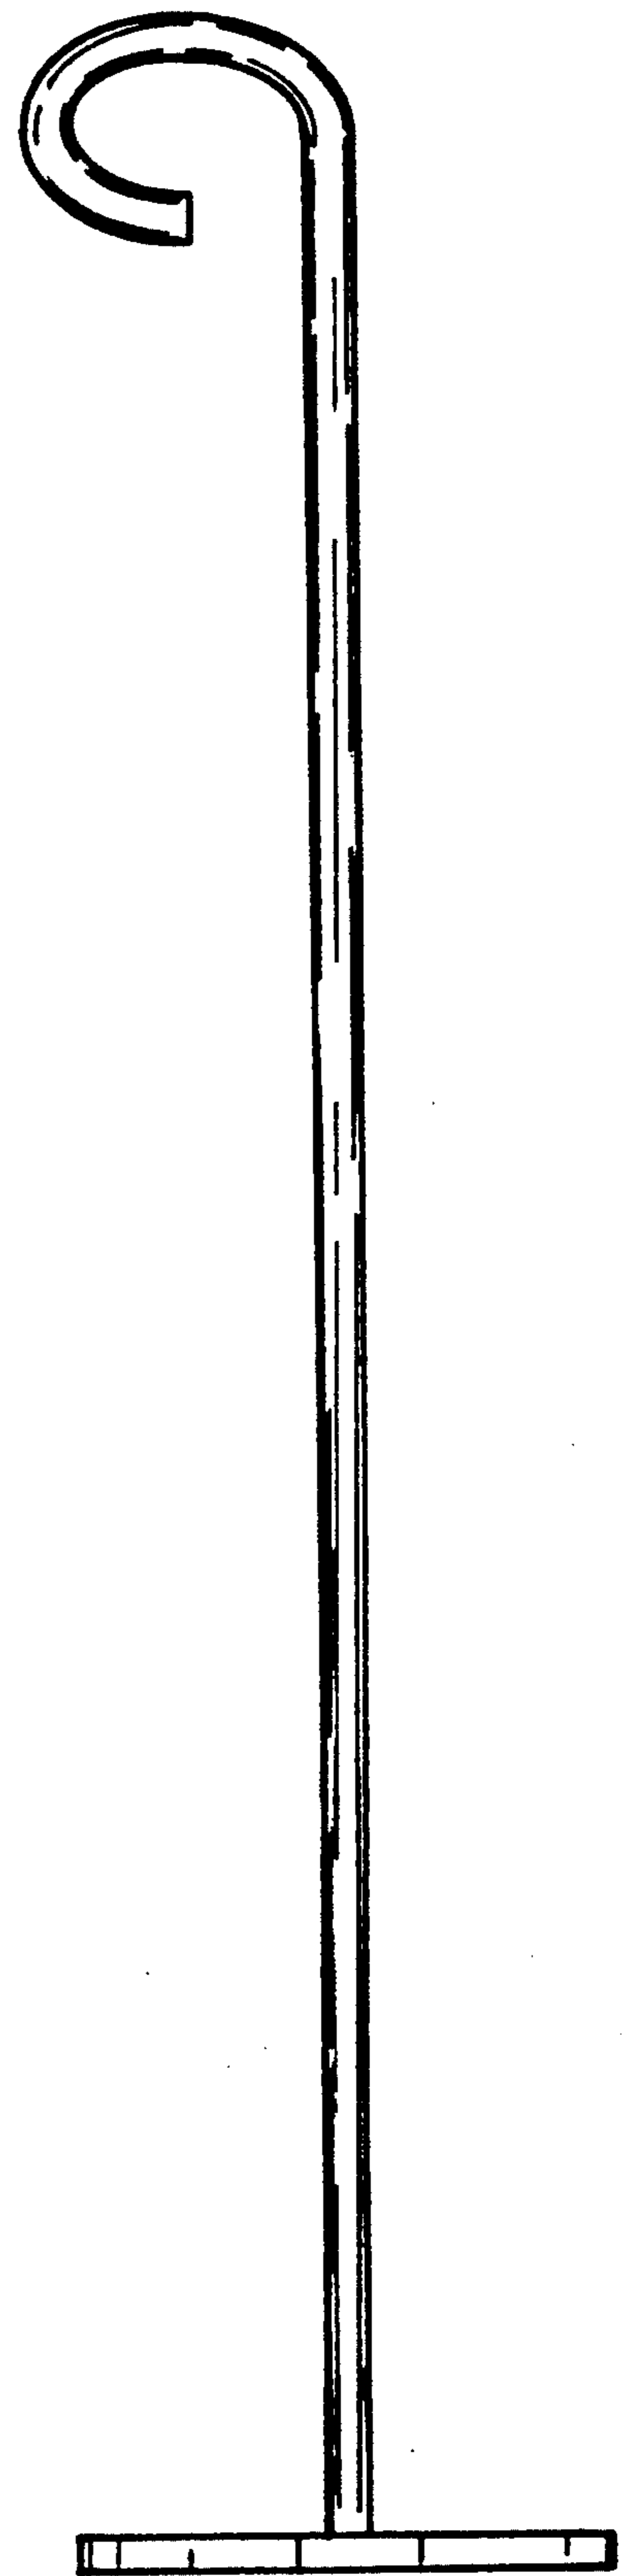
is a front elevational view of the catsup bottle scraper showing my new design;
